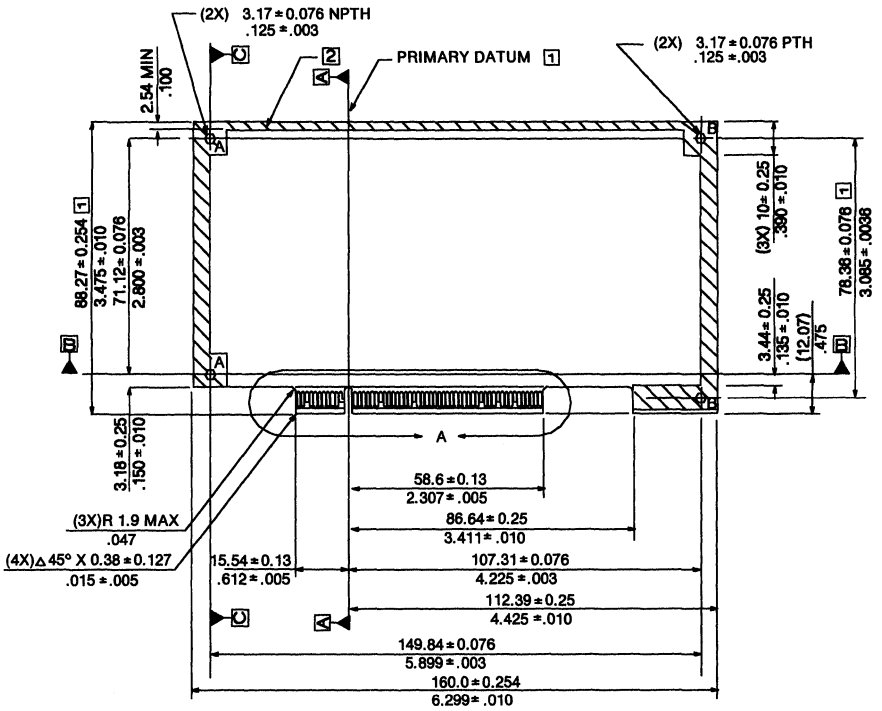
Adapter Dimensions (8 or 16-bit)
